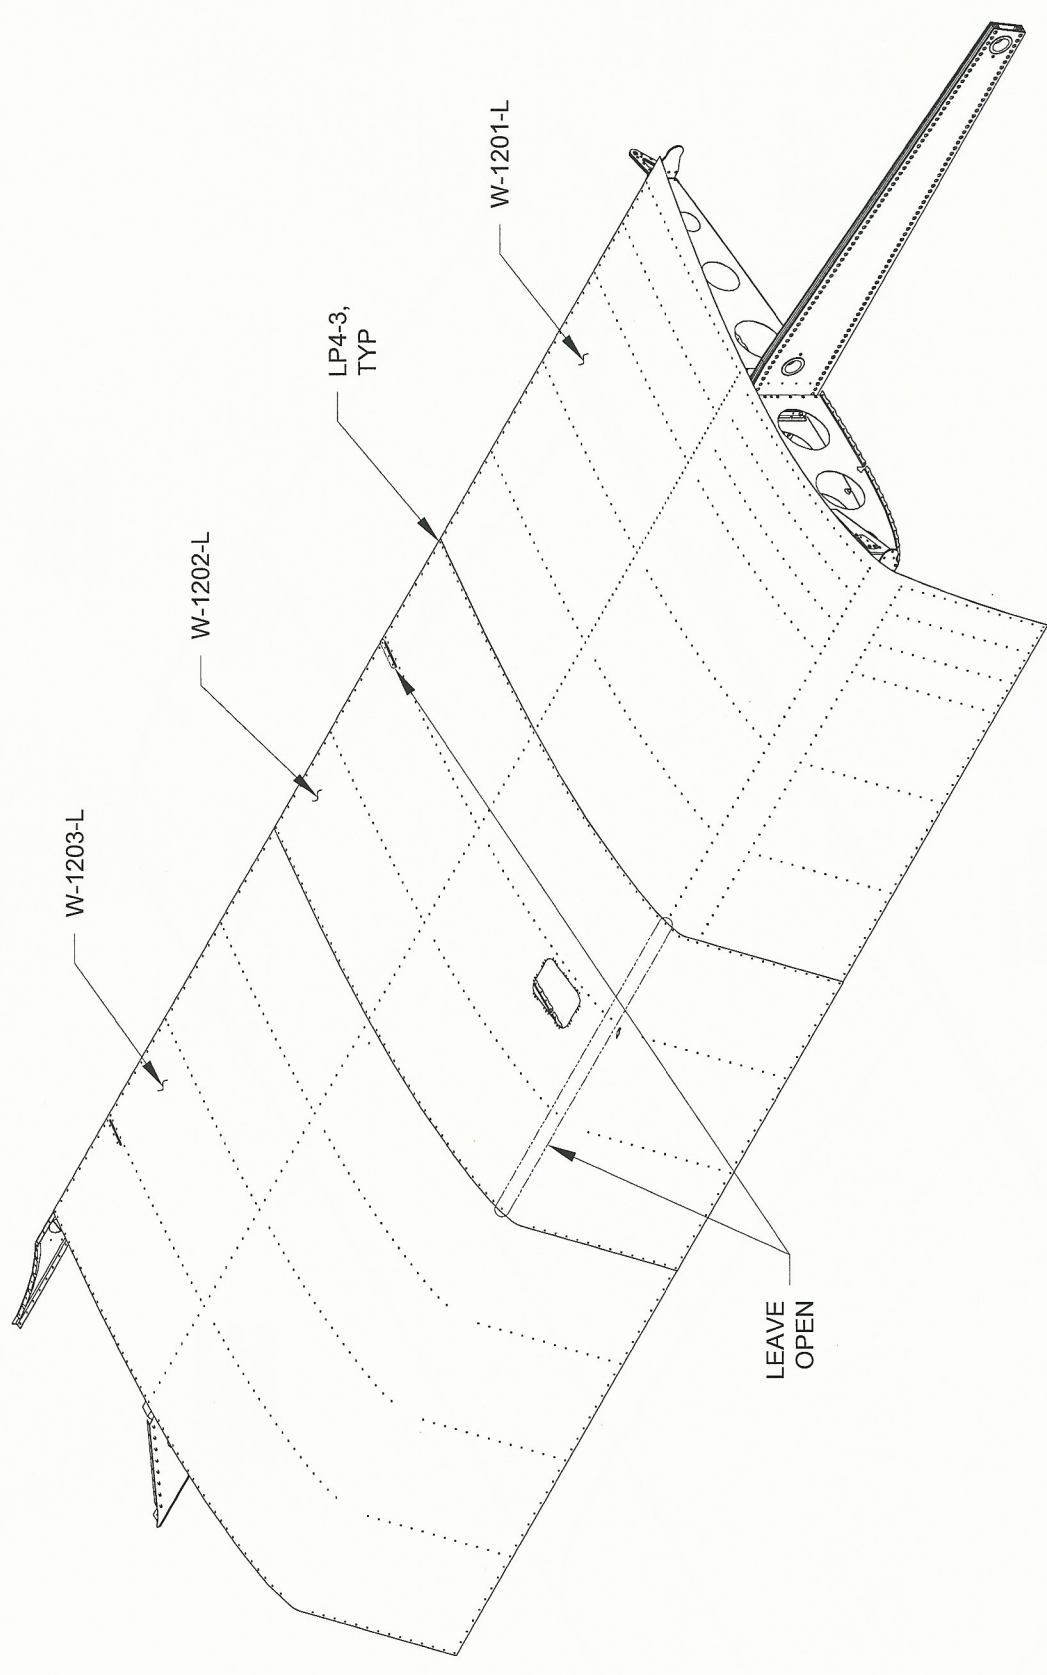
ATTACHING MID WING SKIN (LEFT WING SHOWN)
